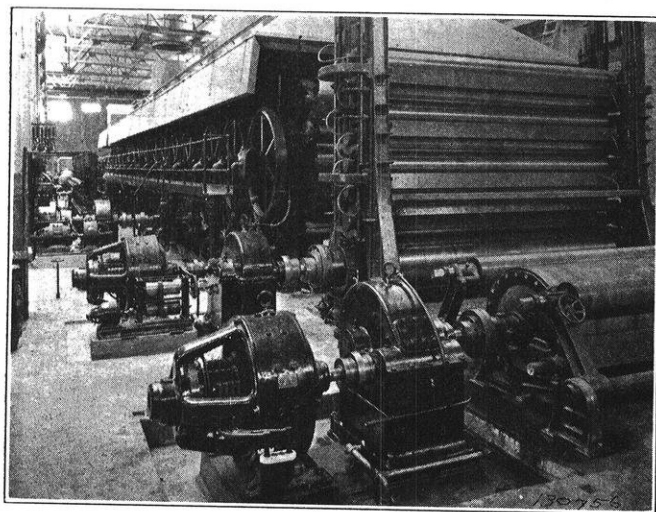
THE FOURDRINIER MACHINE. This picture shows the arrangement of the machine itself, driving motors, and control apparatus.
